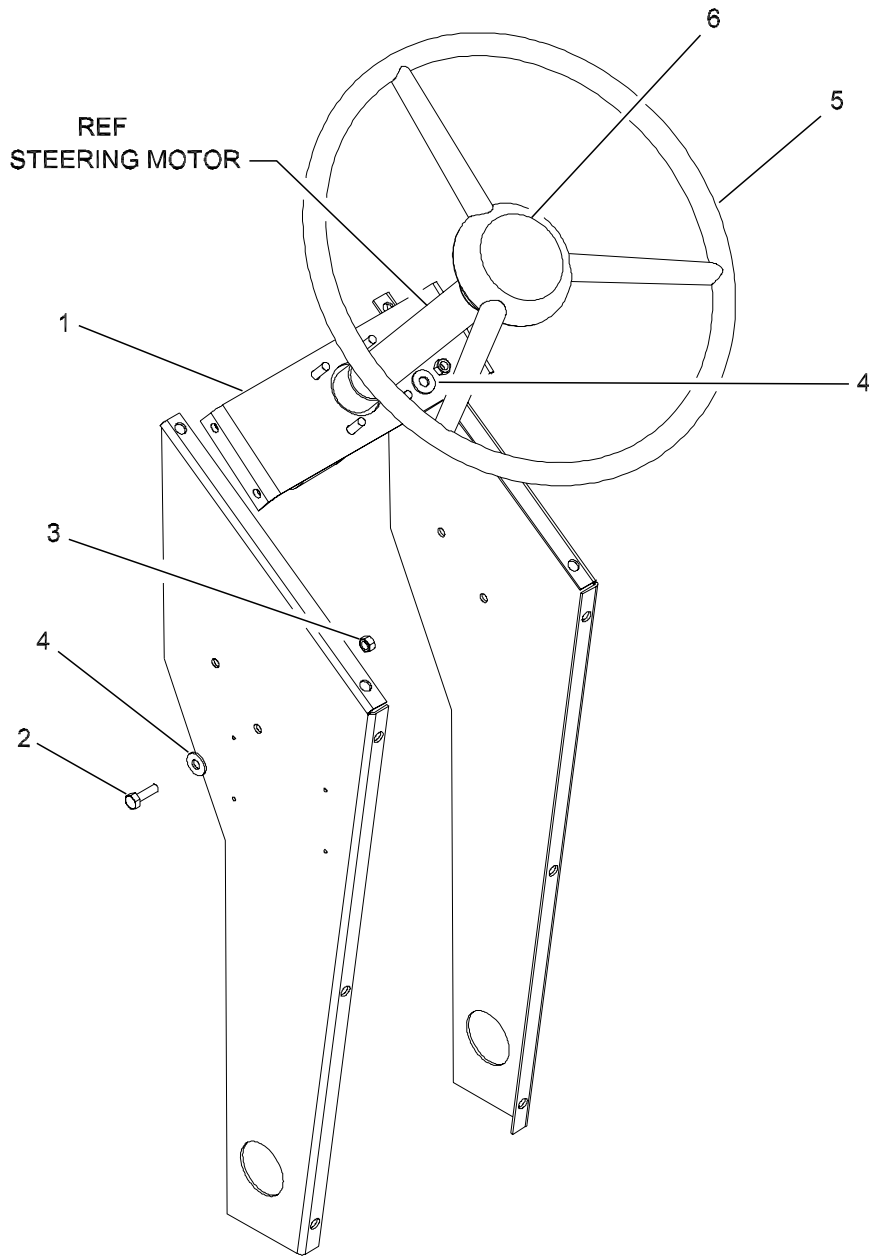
STEERING ORBITAL MOUNT ASSEMBLY
